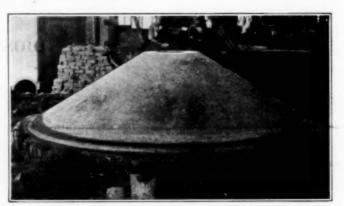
PART OF A MOLD FOR A VACUUM PAN
